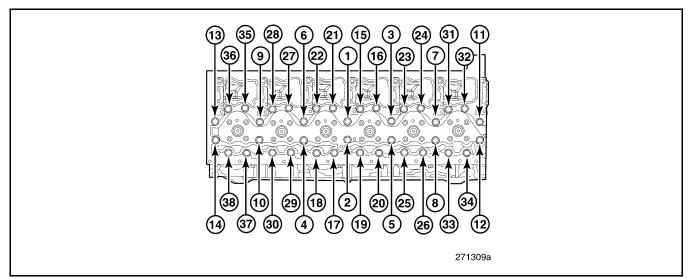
Torque Sequence Screw Numbers — Head to Block
